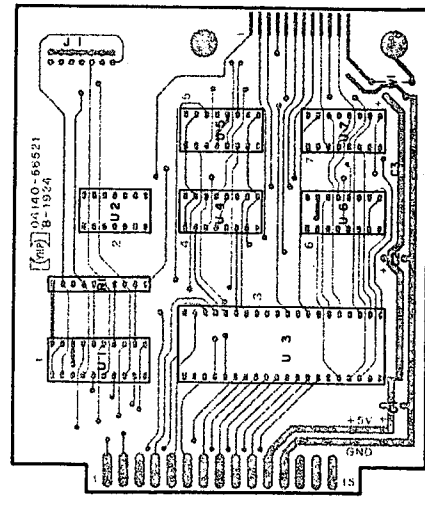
A21 HP-IB Interface Assembly Schematic Diagram.
